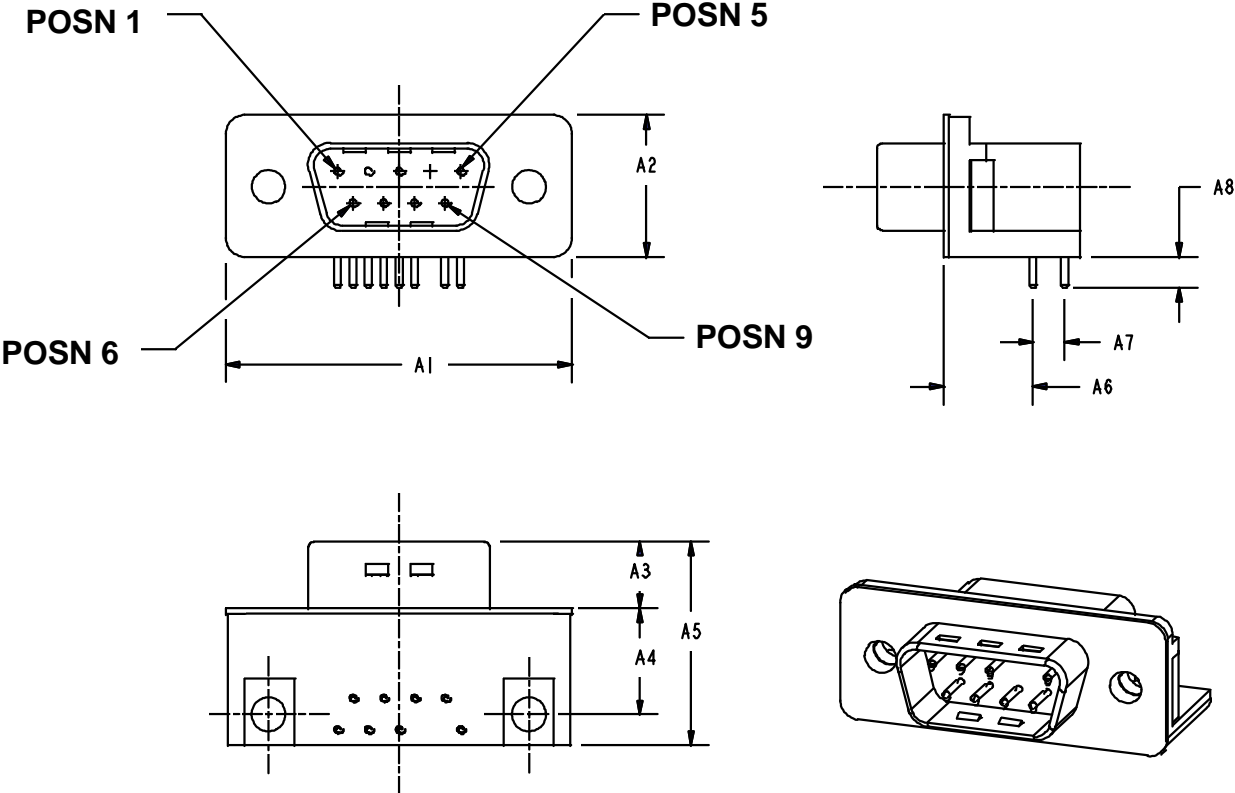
Free board right angle thru hole (version 1) overview and outline dimensions
